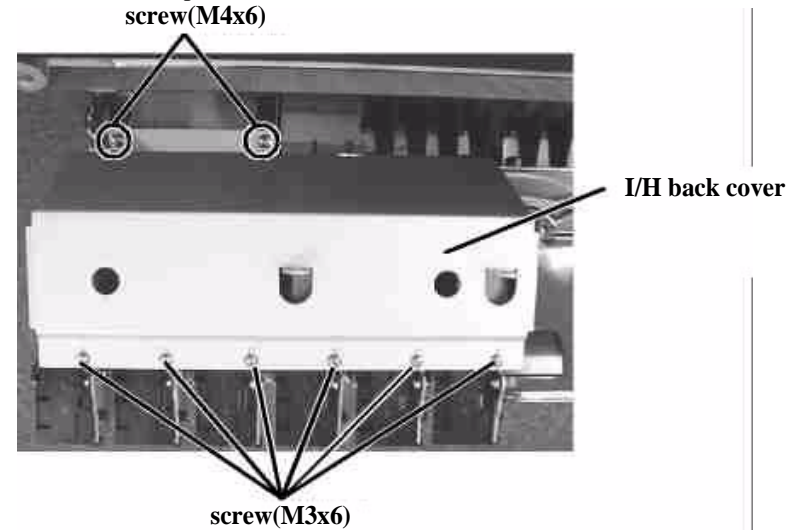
Cover-Open Sensor & Holder Frame Removal - R side
